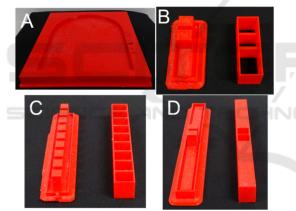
Base plate (A), bend actuator (B), bulge actuator (C), and flap actuator (D) mold printed using a 3D printer.
